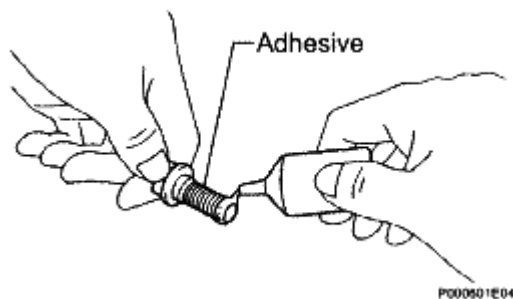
Applying Adhesive To 2 Or 3 Threads Of Mounting Bolt End
